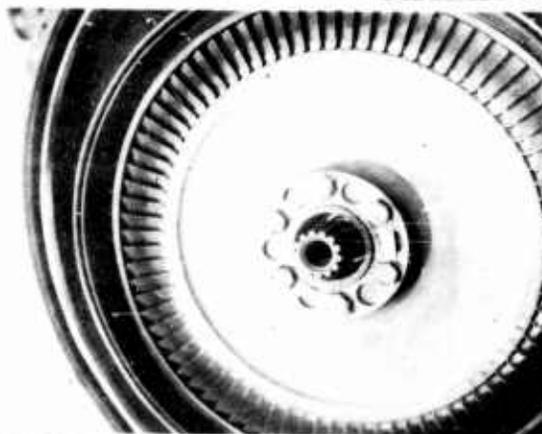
N2 Turbine Showing Marks Used To Determine Location For Turbine Wheel Rotation Unbalance Test.
